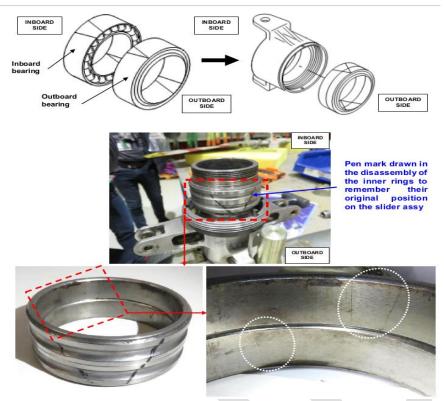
Scheme of the duplex bearing assembly and its installation in the support bearing sleeve assembly and details of the engravings on the duplex bearing inner rings (white ellipsis), which were correctly oriented but not aligned with each other to form the V-shaped mark.
